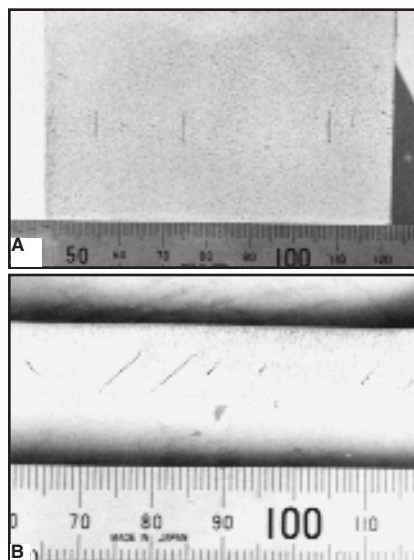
Morphology of transverse cracks after magnetic particle inspection for FCAW process. A — 9.5mm depth from the weld face; B — longitudinal section perpendicular to the plane of the plate.
